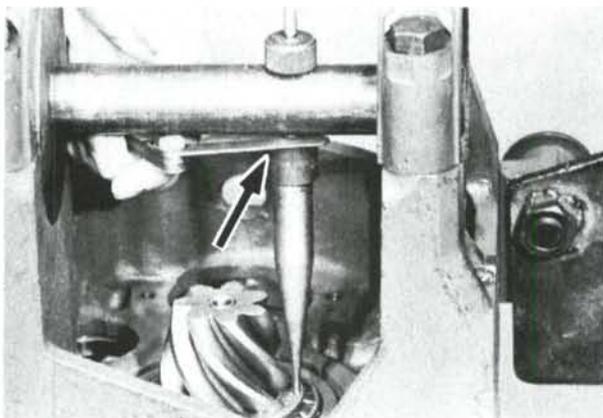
Use a feeler gage to measure gap between spacer and shaft.
